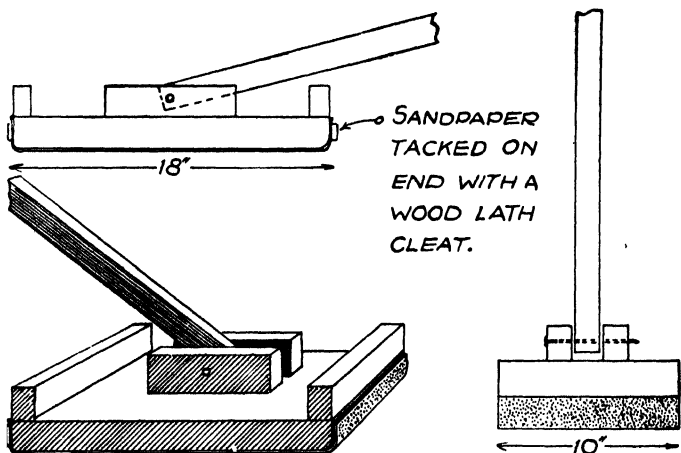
A Home-made Sandpapering Tool. Useful for Floor Finishing.
